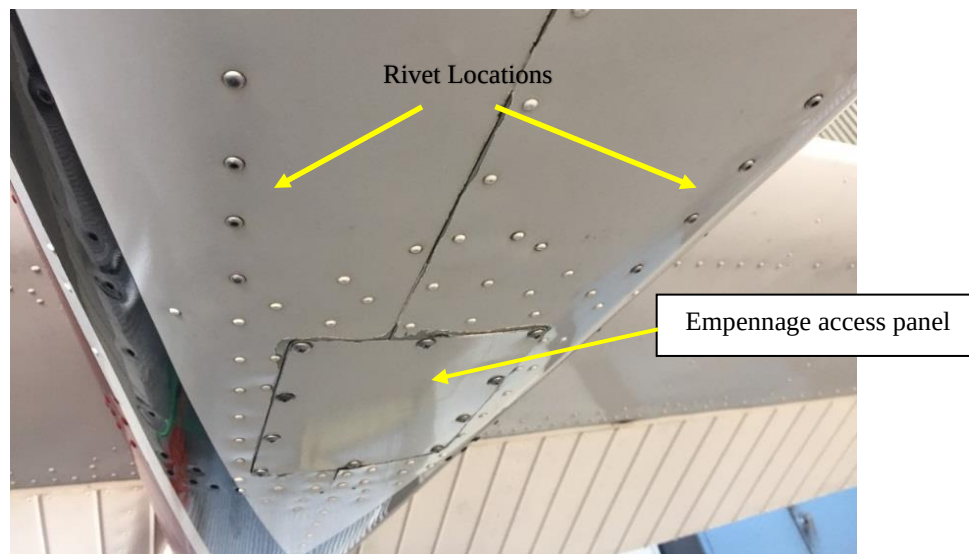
ACCESS PANEL SCREWS AND ZEE ANGLE RIVET LOCATIONS
